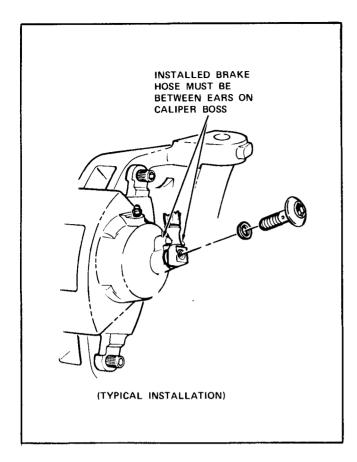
Installation Drawing - Brake Hoses - Disc Brakes
